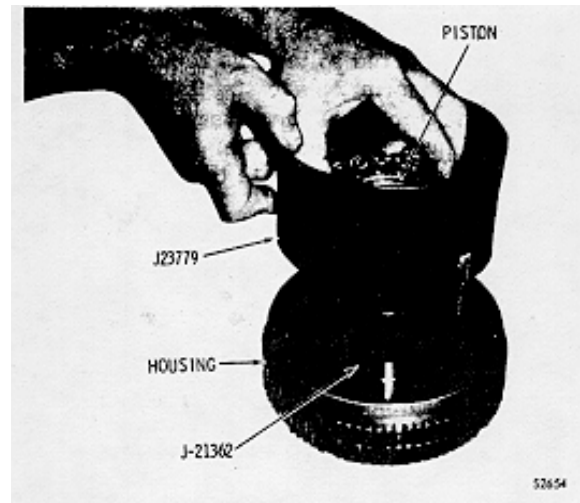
Installing forward clutch housing piston, using sealring protector tool
